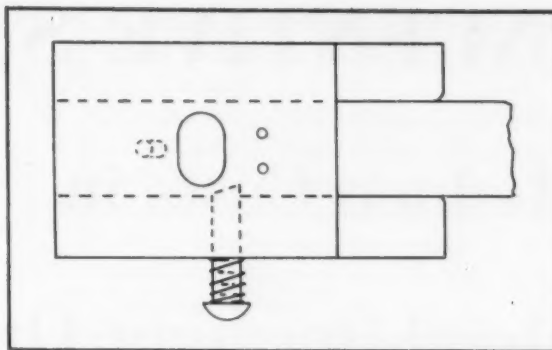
Station stops are properly shown in closed positions on tool drawings.
